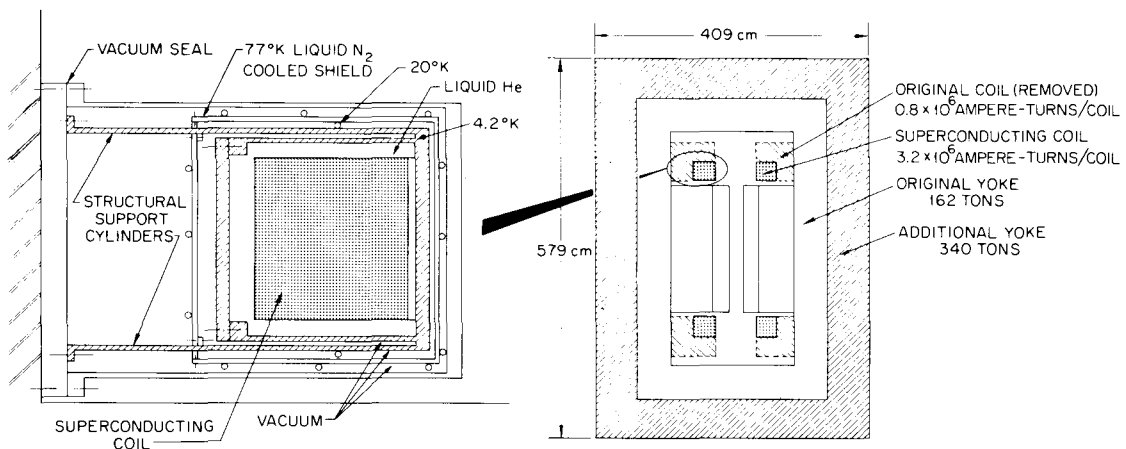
A cross sectional view of ORIC showing the additional iron to be added to the existing yoke, and details of proposed superconducting main coils. The forces on the coils are transmitted to the yoke through concentric stainless steel cylinders bolted to the yoke.
